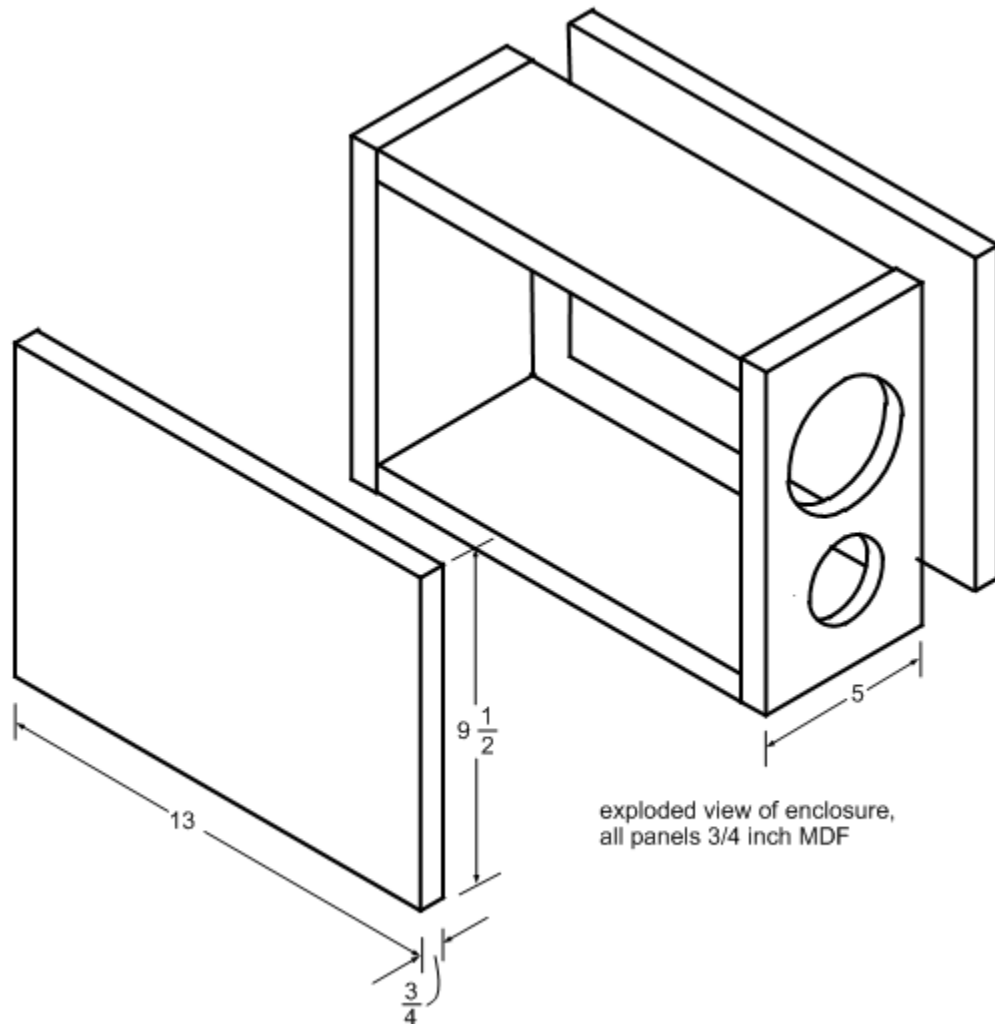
First construct the inner frame and install the vent. Following that, attach the side panels to the inner frame using butt joint –type construction.
